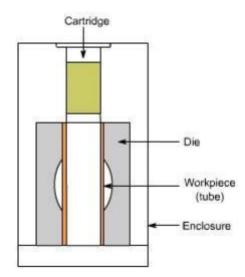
Schematic illustration of contact technique of explosive forming.
